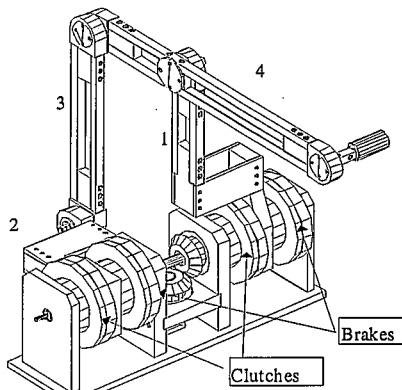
The Passive Trajectory Enhancing Robot P-TER
